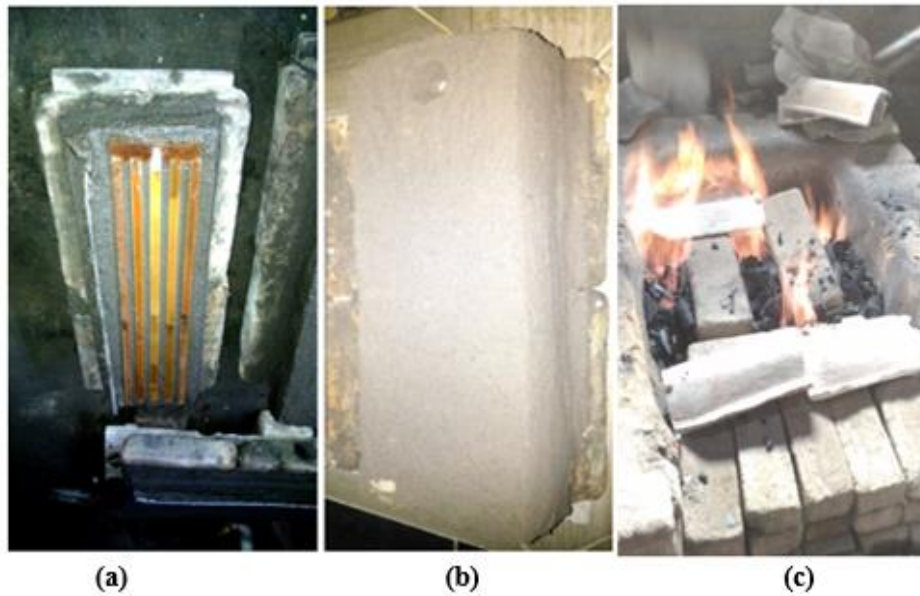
Stages of investment casting (a) wax pattern (b) coating mold (c) dewaxing.
